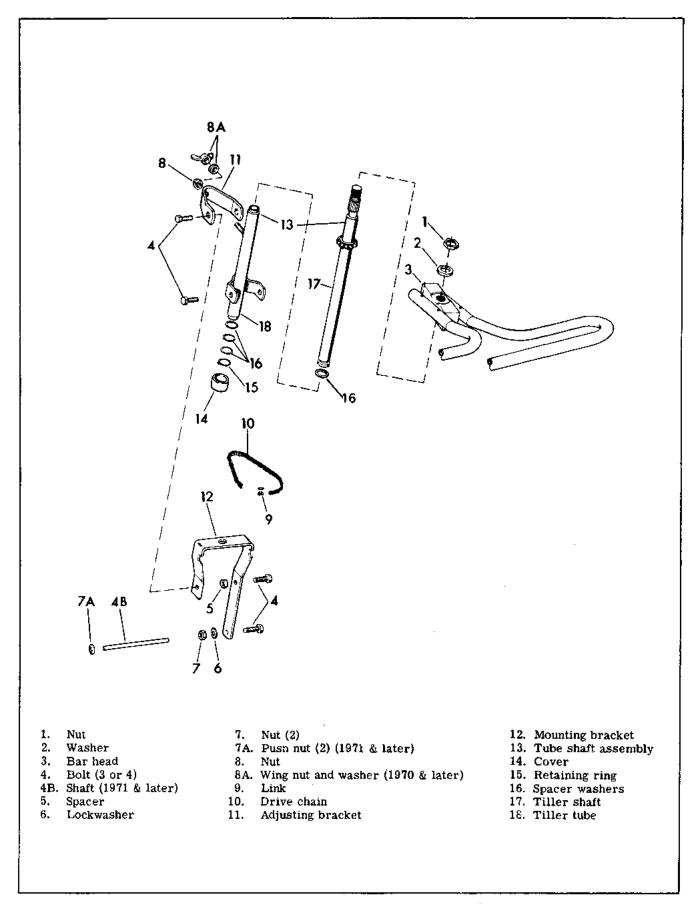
F-69. Tiller Steering (1973 & Earlier) - Exploded View
